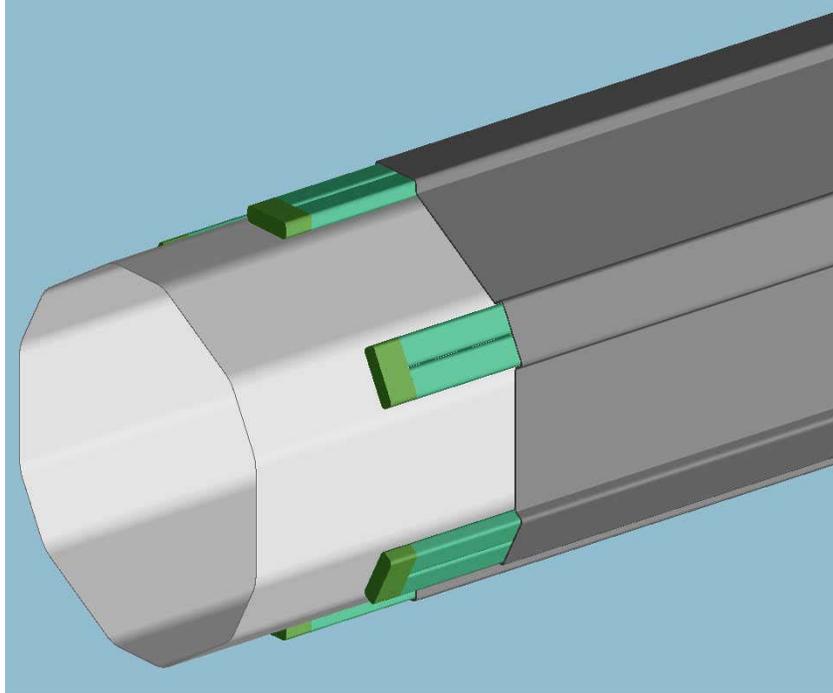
Exploded view showing the cooling tubes in the castellations and the turnaround.
